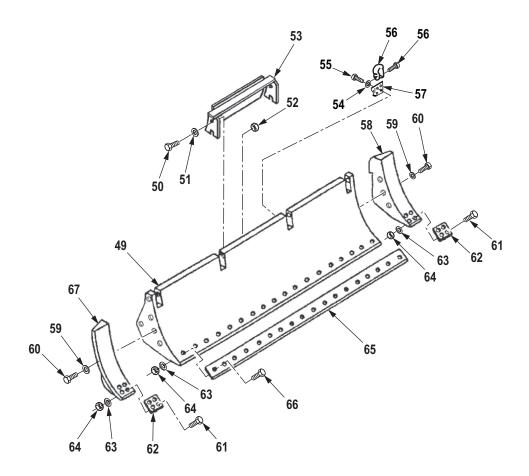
Apron Dozer and Blade Assembly. (Sheet 1 of 2)
